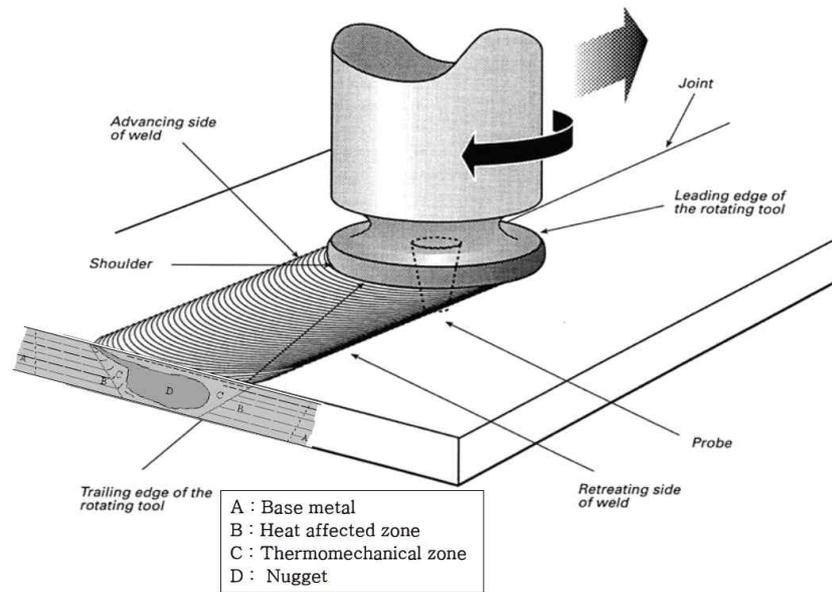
Tool configuration and weld cross section used in friction stir welding
